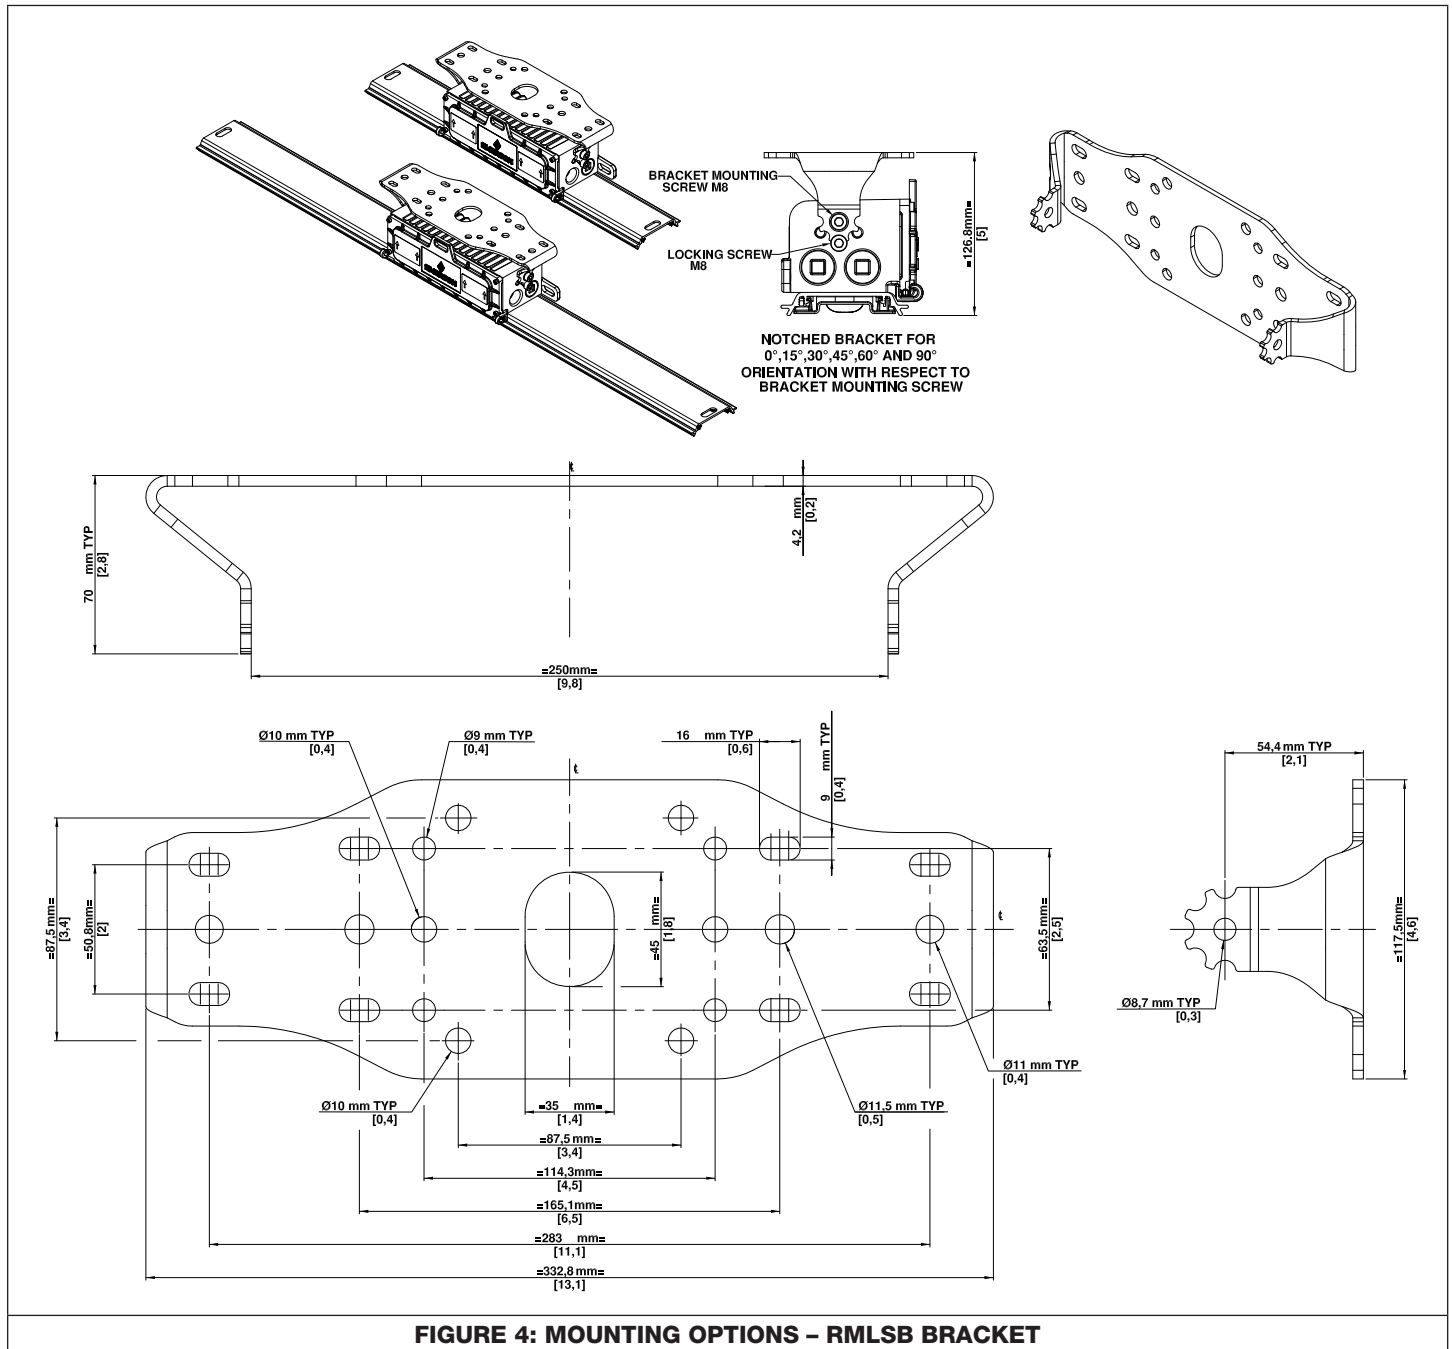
MOUNTING OPTIONS – RMLSB BRACKET
